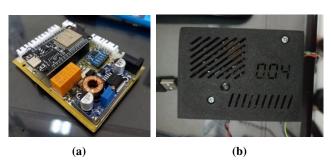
PCB and system installation testing results (a) Assembled PCB with component layout (b) System integration testing in vehicle
